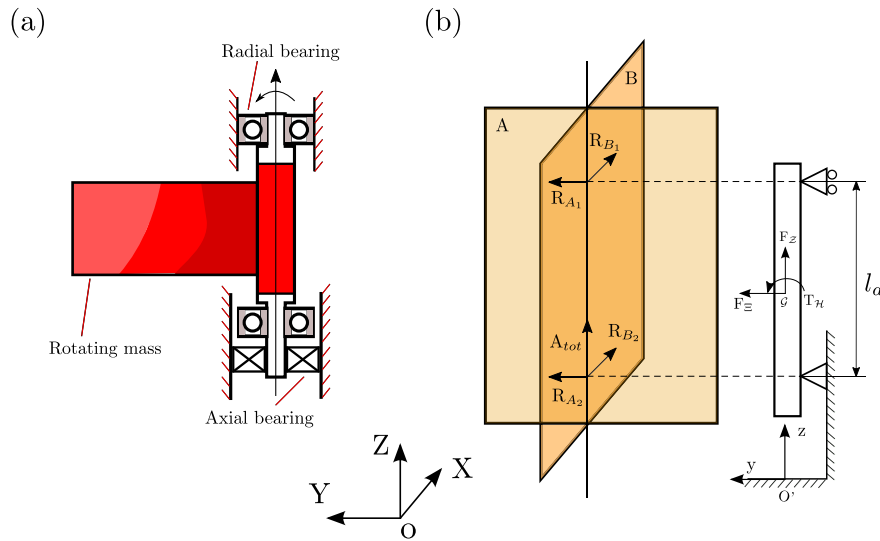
Schematic representation of a possible bearing configuration. (a) Bearing configuration with a pair of radial bearings and an axial bearing. (b) Related scheme for load computation, considering the shaft as a supported beam on two perpendicular planes, A and B. A and B.
